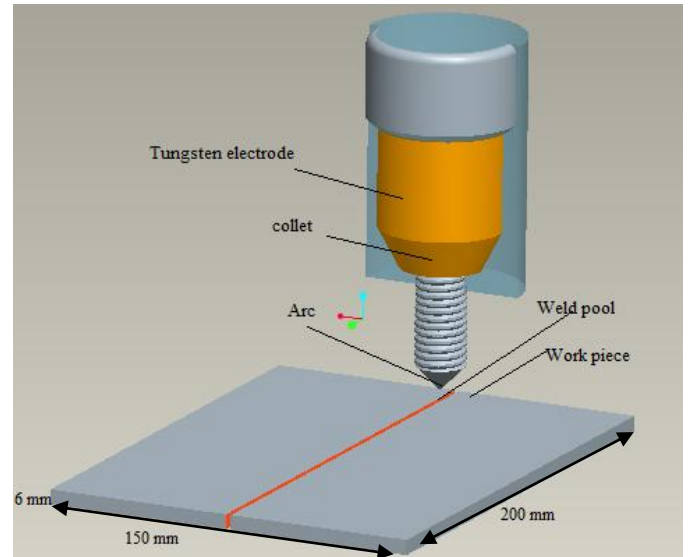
Schematic of the TIG welding process by using Pro-e model
